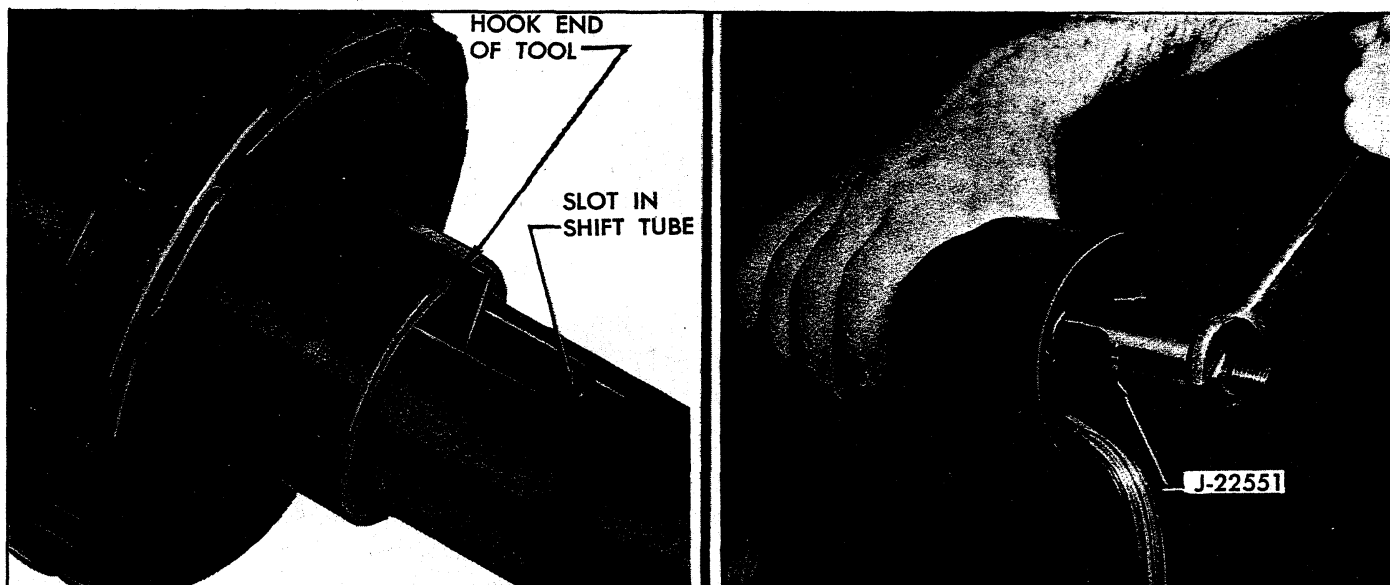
Removing Shift Tube Using Shift Tube Remover J-22551
